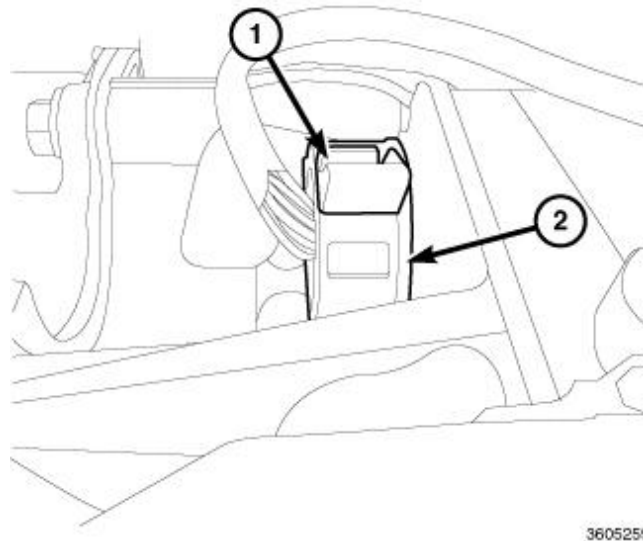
Locking Mechanism Lock & Adapter Plug Connector
